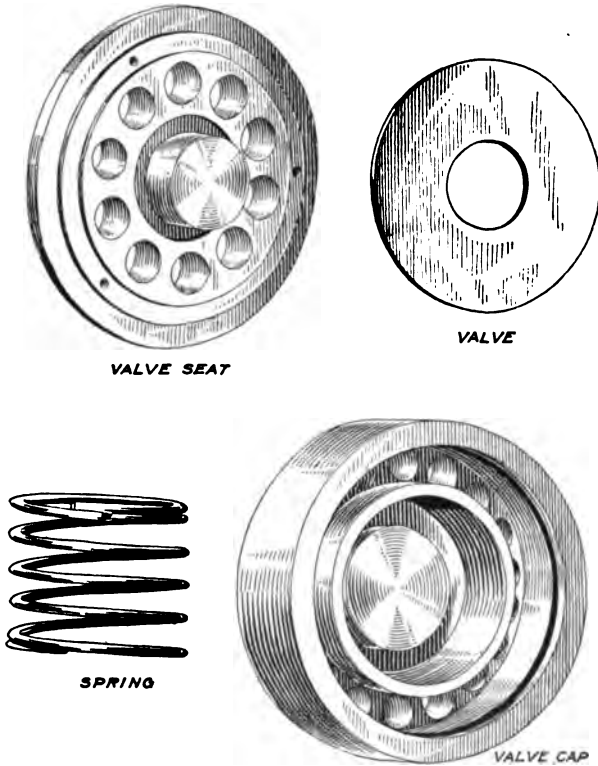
Allis-Chalmers Diesel air-compressor valve.
